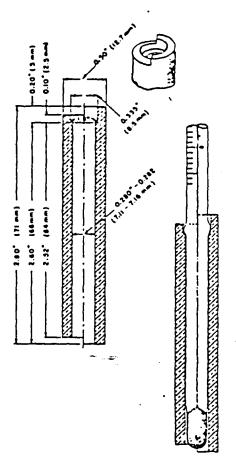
Test Gage for Checking Enlargements on Thermometers
